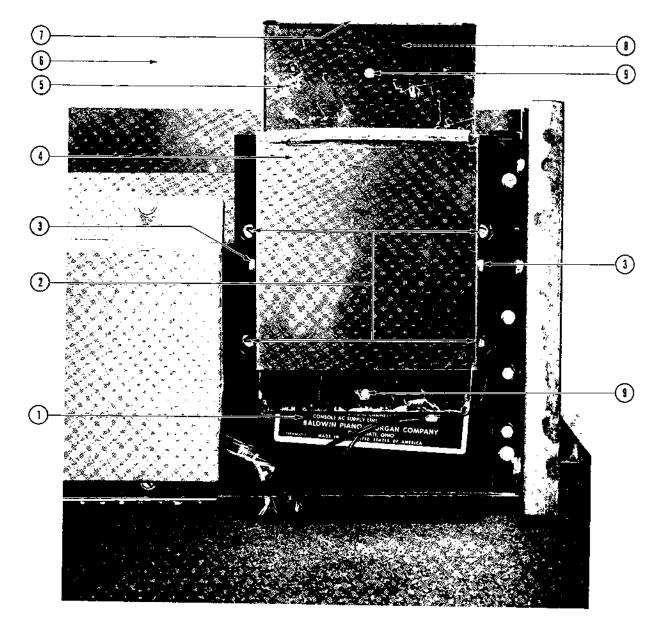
CASSETTE DRAWER ASSEMBLY
